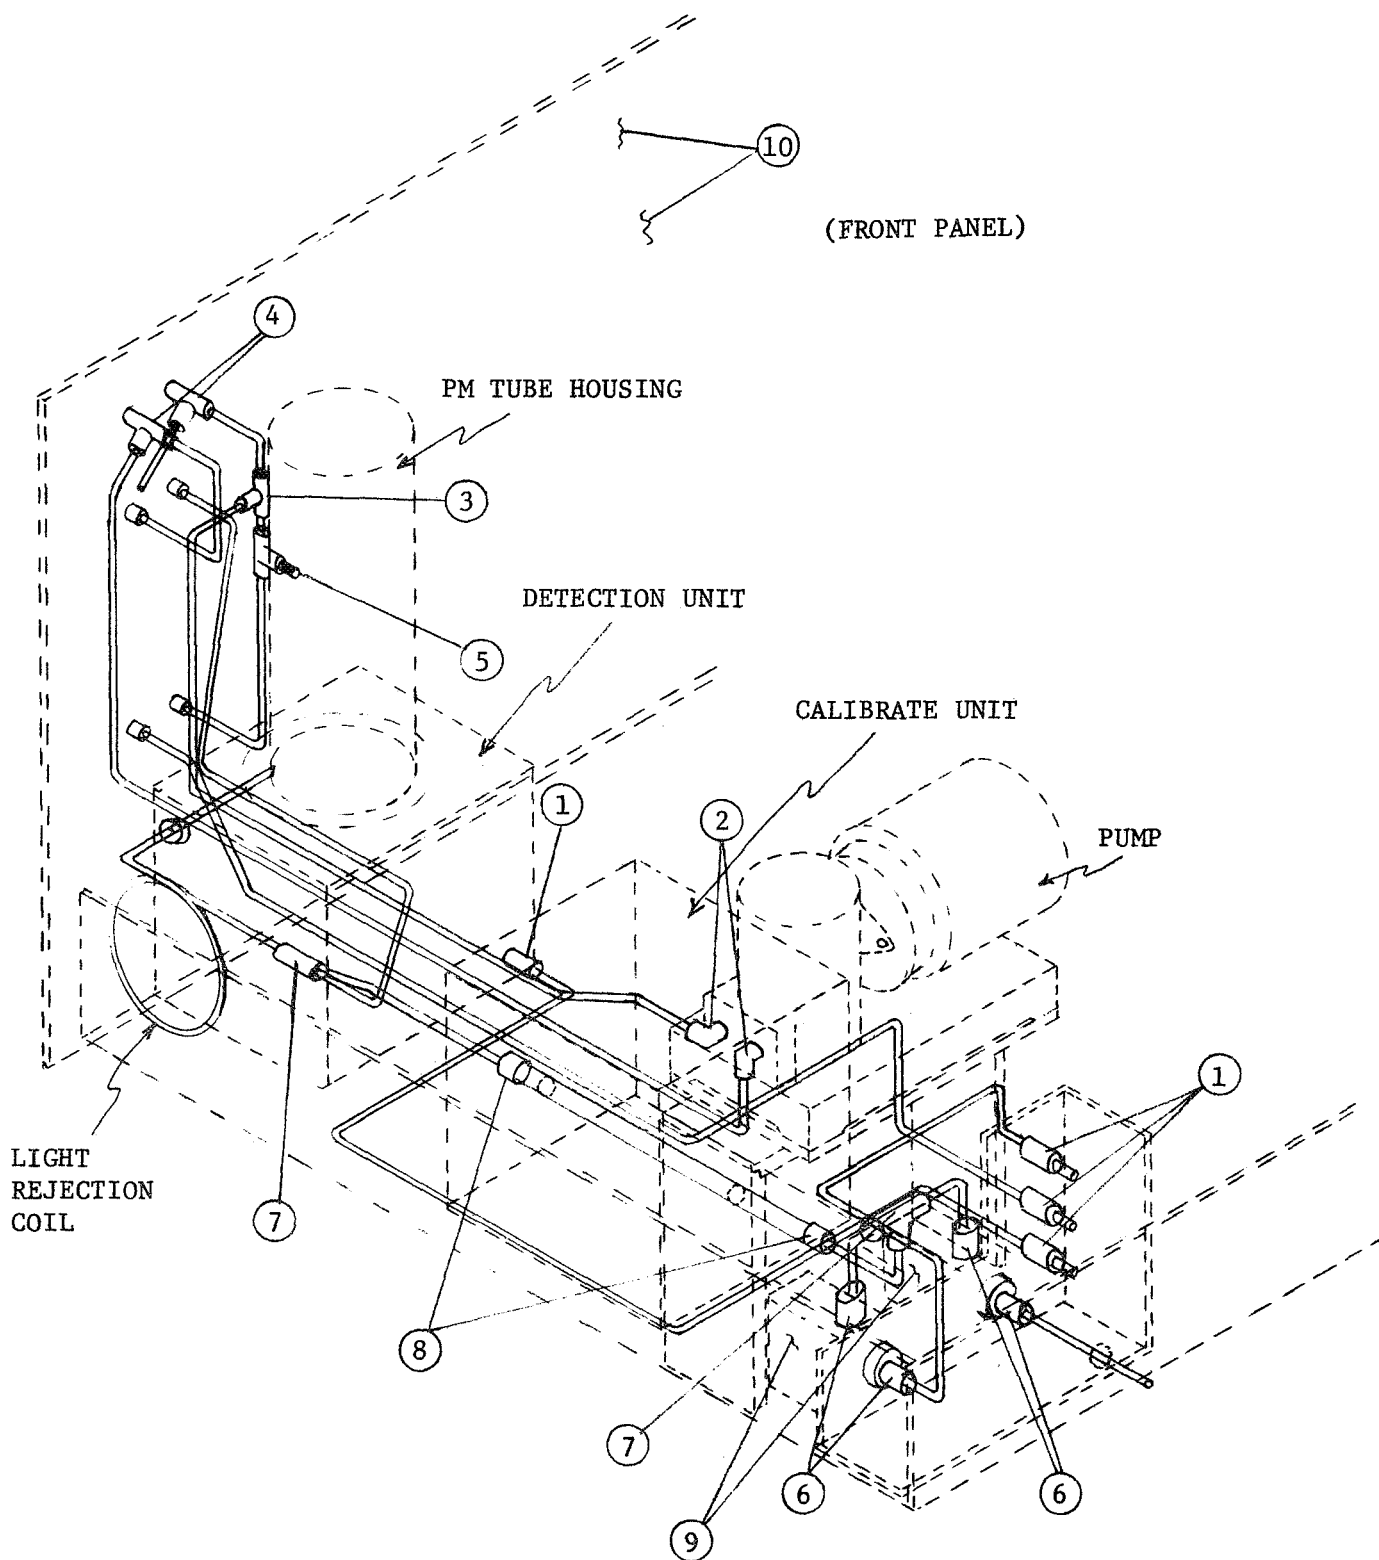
PLUMBING SUBSYSTEM PARTS LAYOUT
